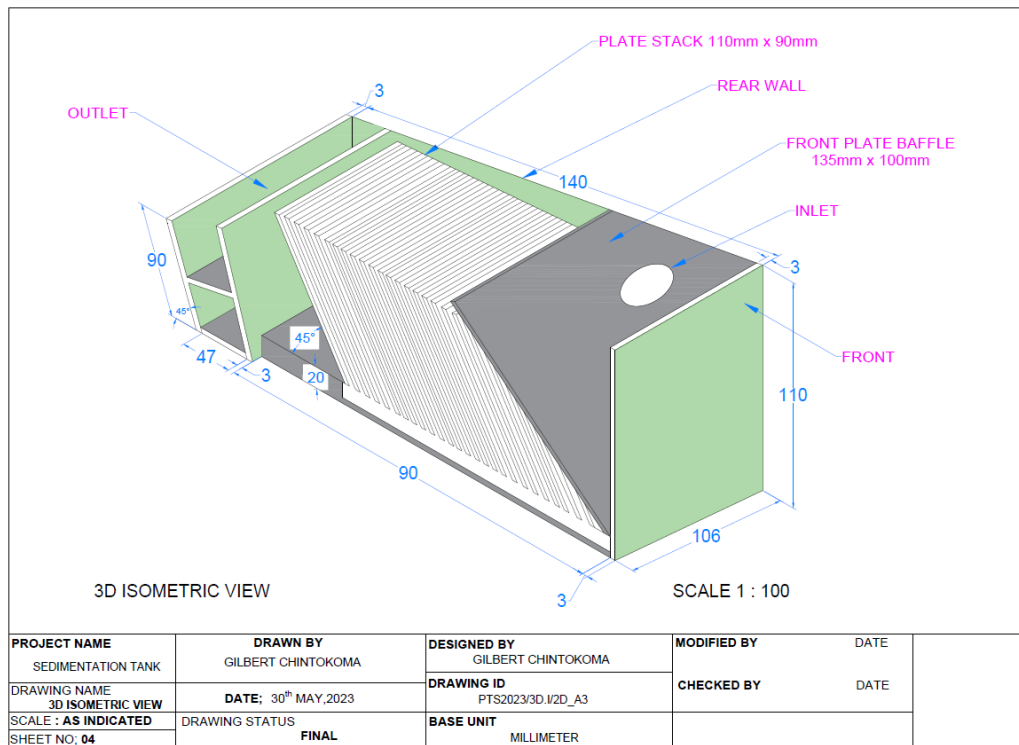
3D isometric view of the 45° angle inclined plate settler
